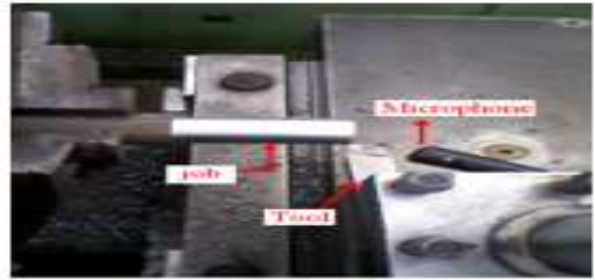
Experimental set-up used for machining mild steel on conventional lathe centre
